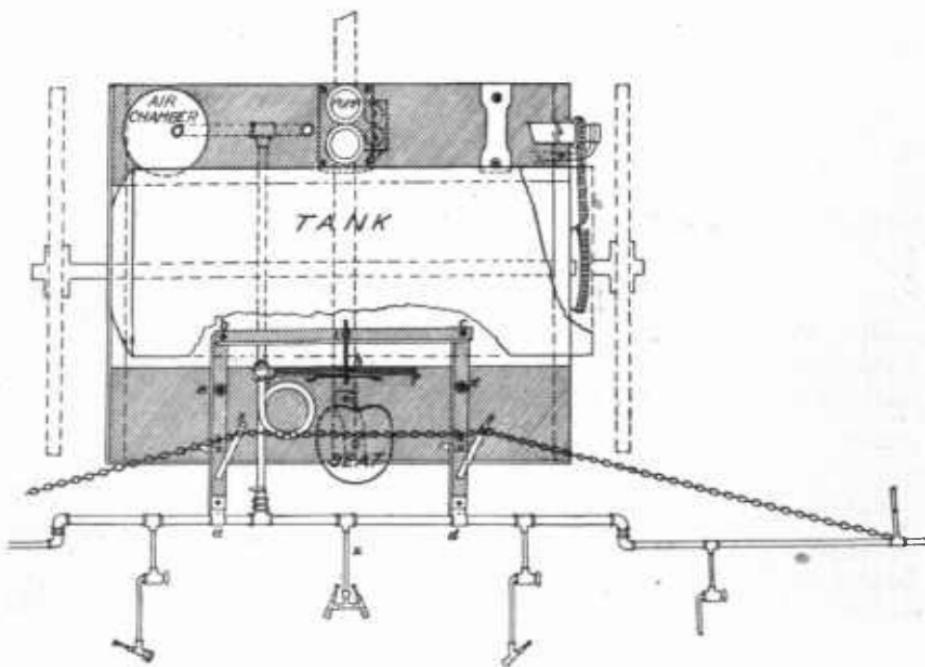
Diagram showing arrangement of row sprayer on machine.
